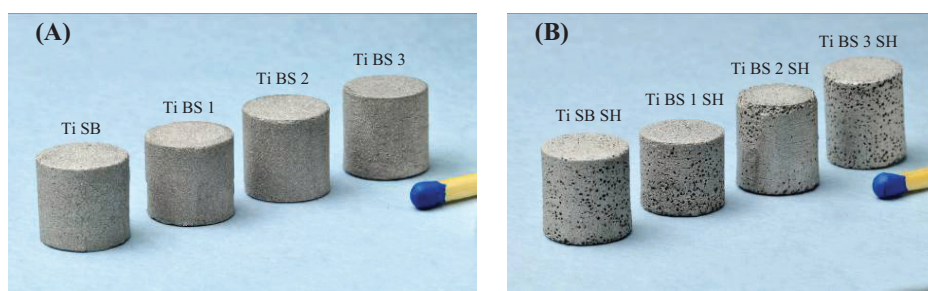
Pictures of the sintered samples. (A) samples without space holder (B) samples with space holder. Sintering parameters: 1300°C, 3 h, vacuum.
